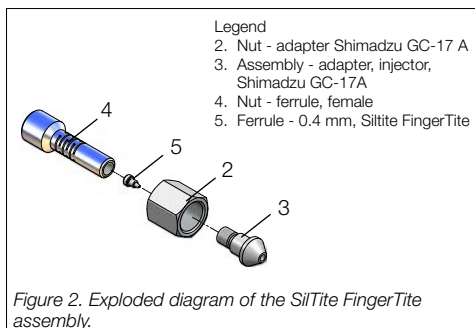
Exploded diagram of the SilTite FingerTite assembly.
